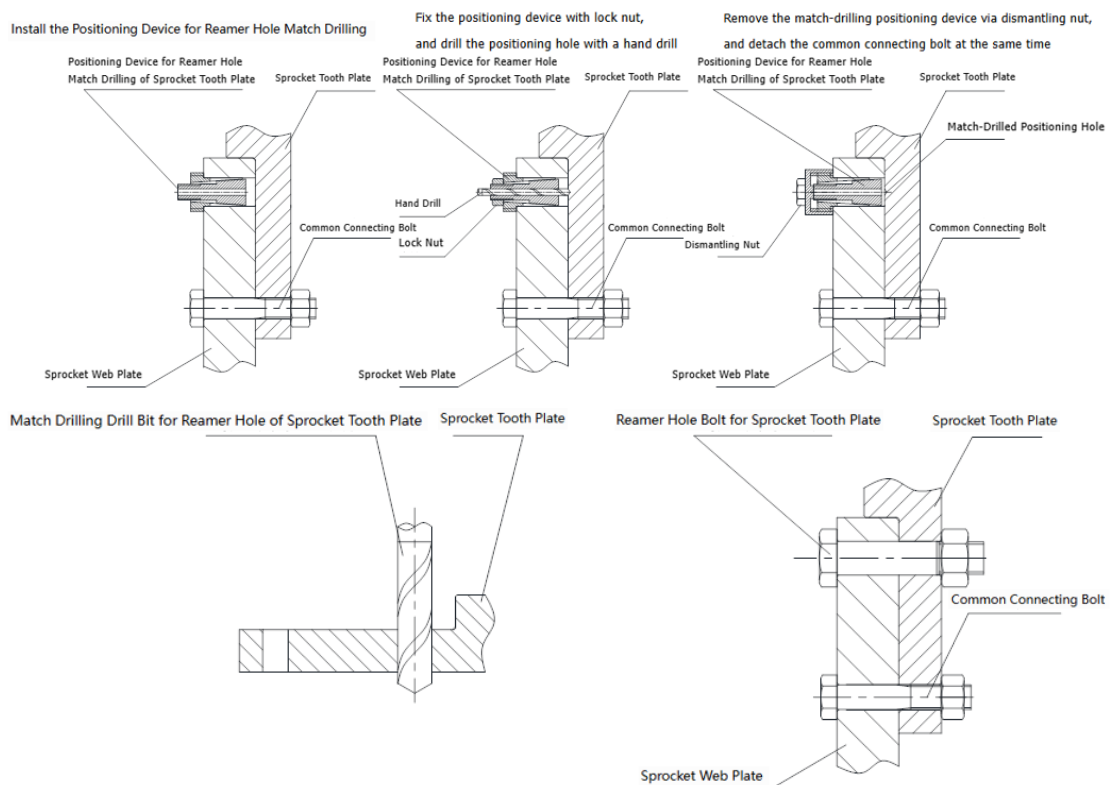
Match drilling flow chart of sintering machine sprocket tooth plate reaming mounting holes
